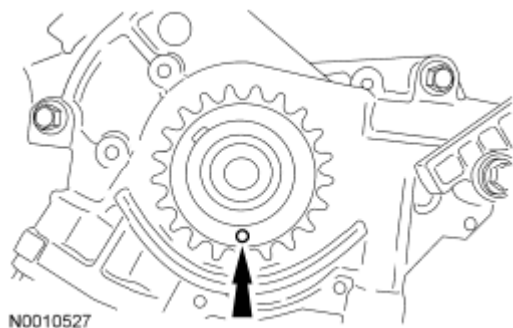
Locating Crankshaft Sprocket Timing Mark In 6 O'Clock Position
